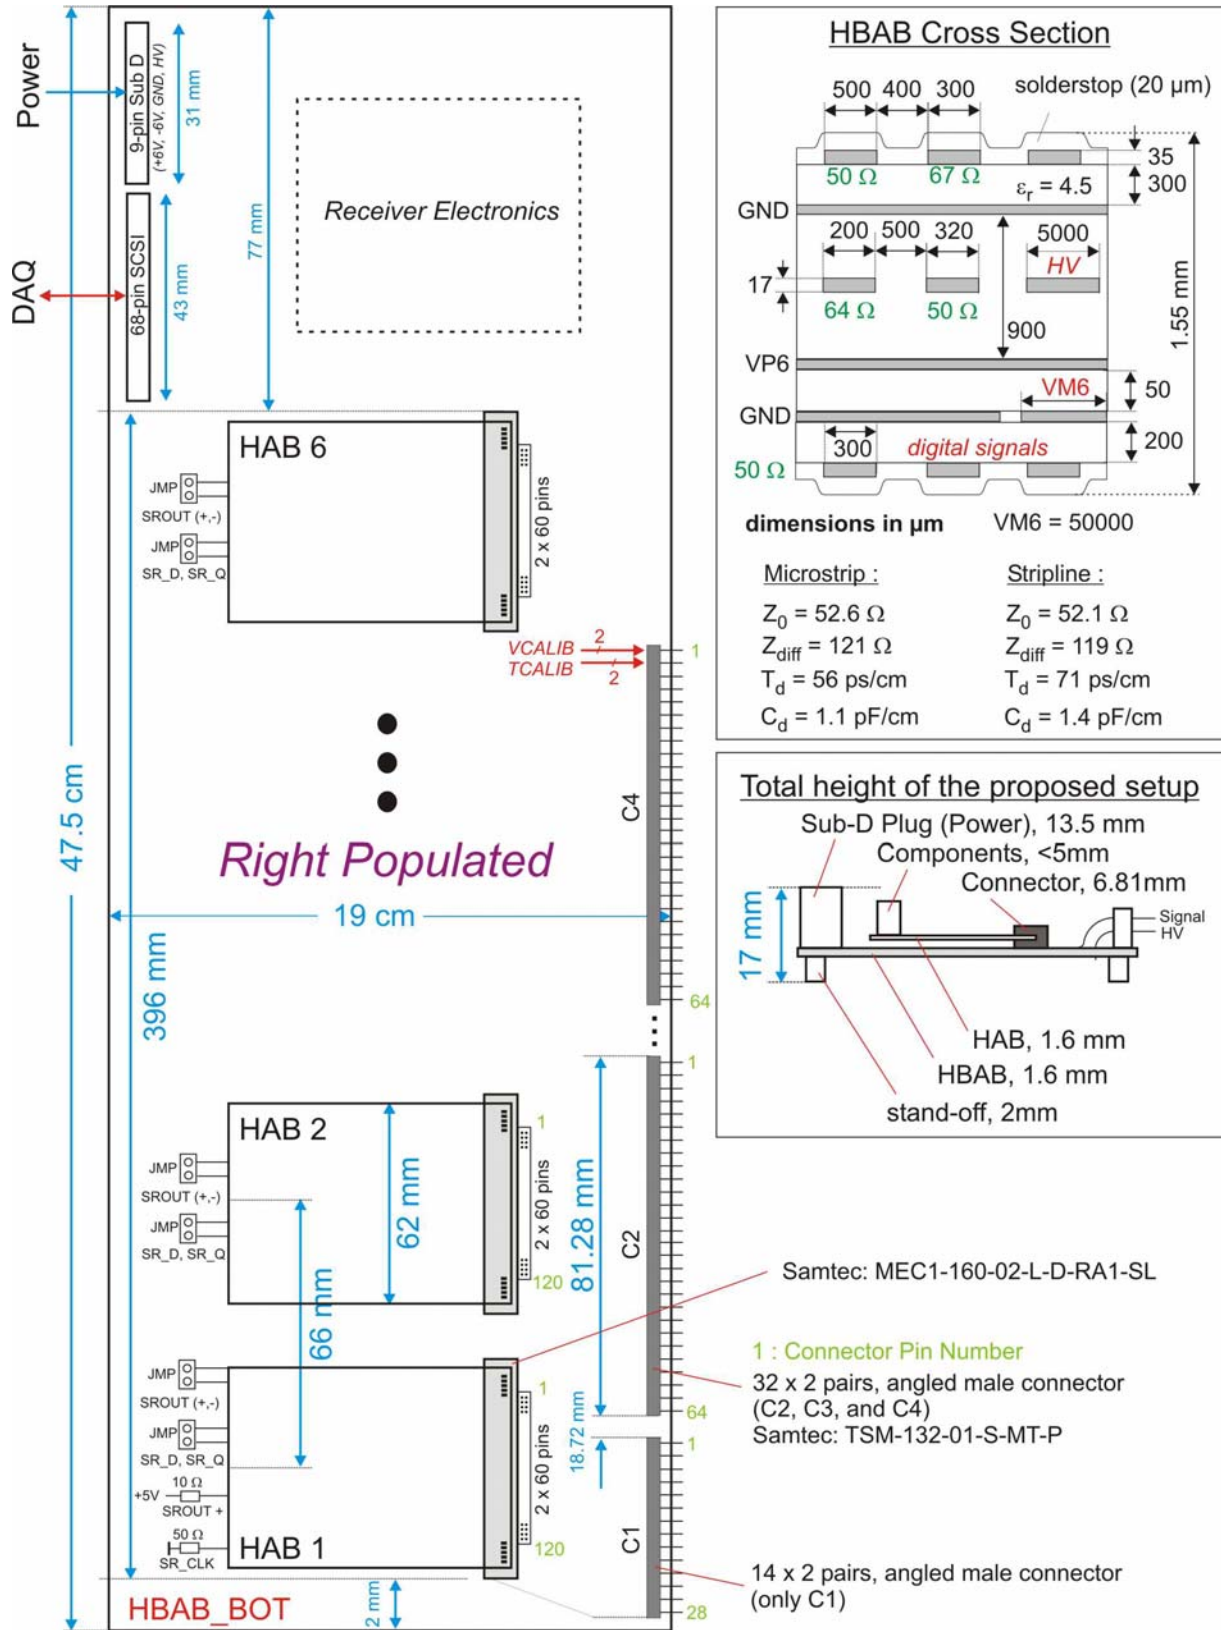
Structure and Dimensions of the HCAL Base Board HBAB
